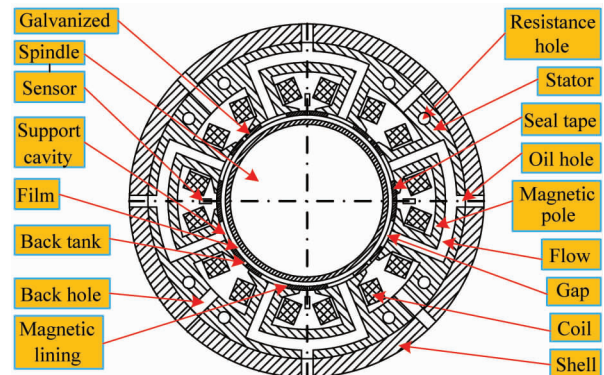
Full-sections drawing of magnetic-liquid double suspension bearing
